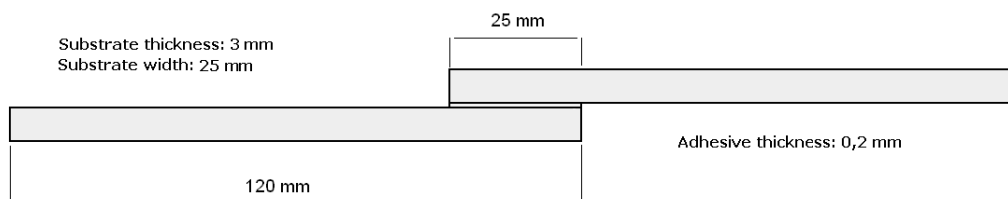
SINGLE LAP JOINT SPECIMEN DIMENSIONS
